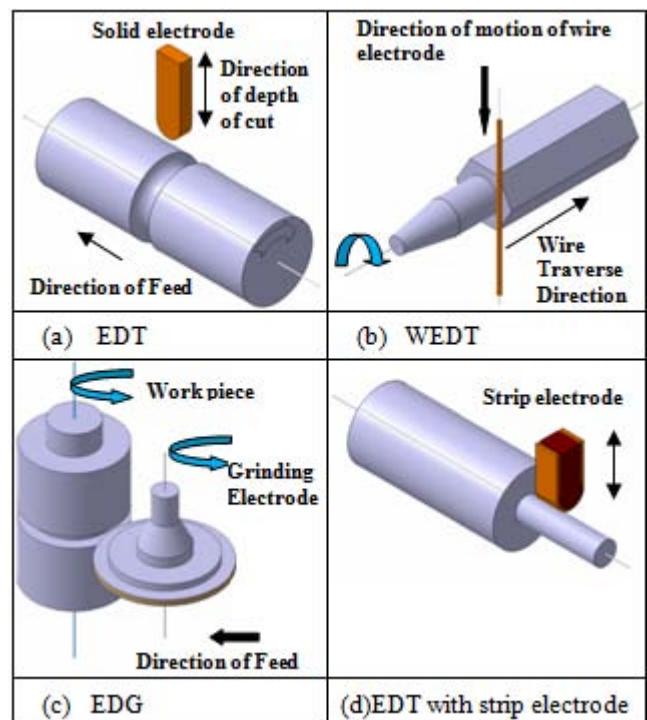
Electric discharge turning using different EDM variants: (a) EDM turning, (b) Wire EDM turning, (c) Electrical Discharge Grinding (EDG), (d) EDT with strip electrode
